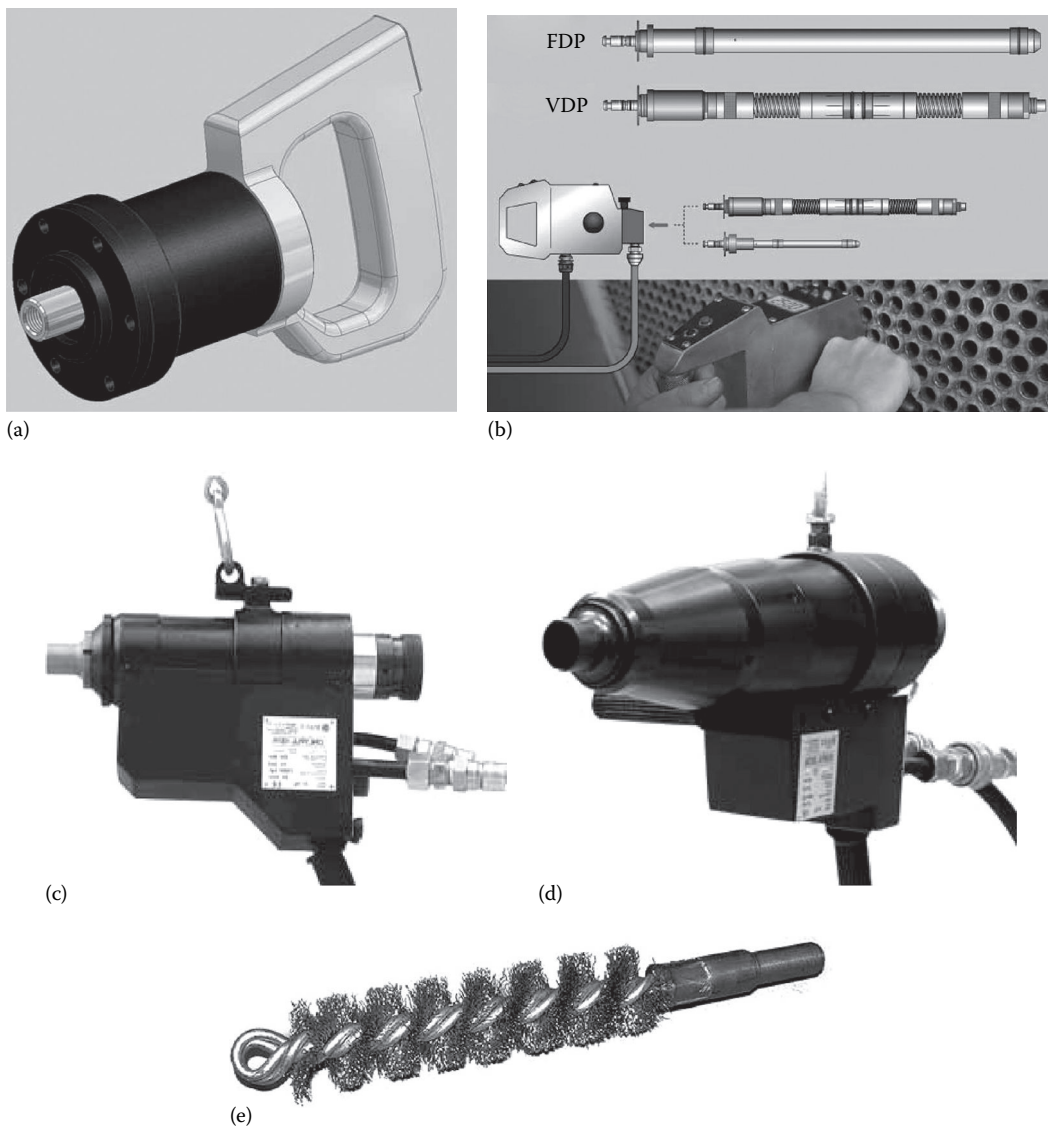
Tube rolling-in accessories. (a) Mafix system dedicated gun for tube locking. (b) probes FDP and VDP with quick-release coupling, (c) semiautomatic continuous hydraulic tube puller, (d) automatic continuous hydraulic tube puller, and (e) flue brushes for tubesheet holes cleaning. (Courtesy of Maus Italia F. Agostino & C.s.a.s., Bagnolo Cremasco (Cr), Italy.)
